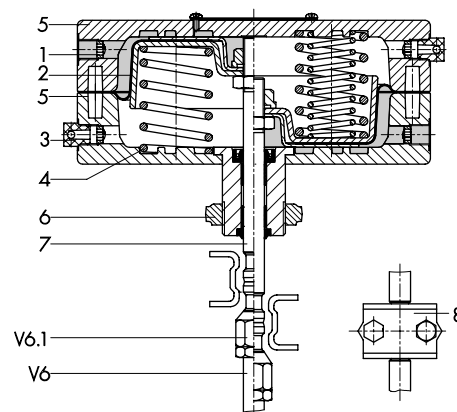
· Sectional drawing of the Type 3271-5 Pneumatic Actuator (right half of diaphragm with additional springs)
